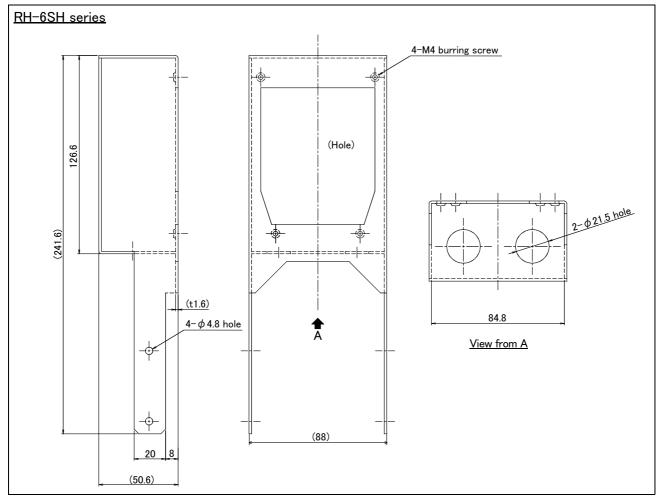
Outside dimensional drawing(RH-6SH series)
